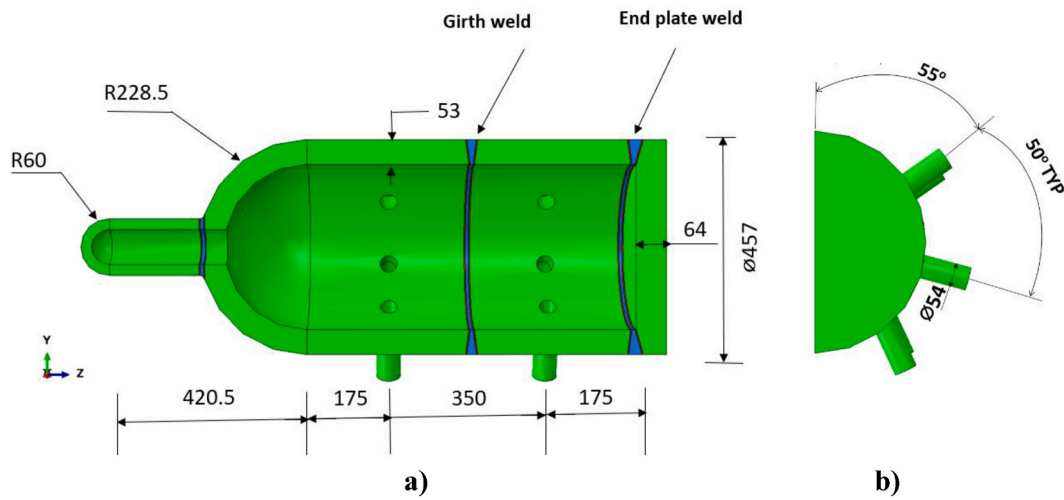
Layout and dimensions of Vessel-1 on a) elevation view and b) side view (All dimensions in mm).
